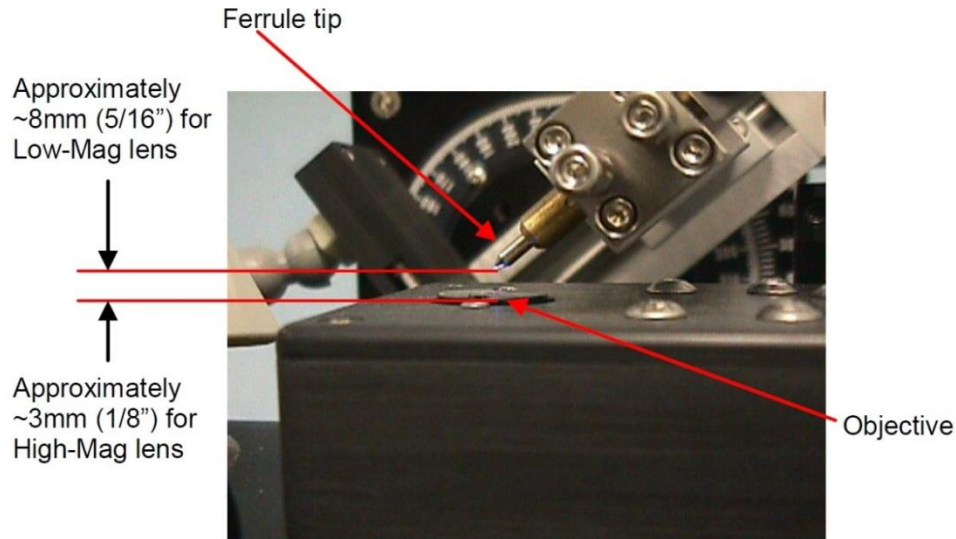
A photo of inline inspection scope to inspect the polished surface of ball lens.
